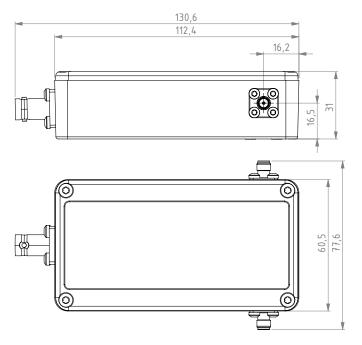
Physical dimensions of the BT-5A1500V in [mm]
